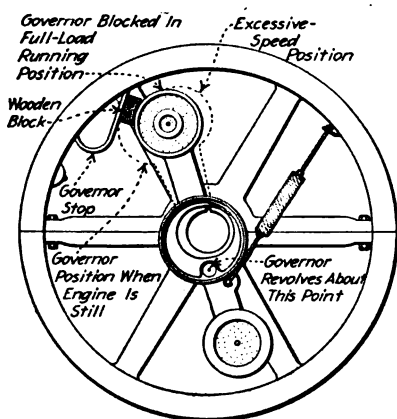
Shaft governor blocked in full-load running position for adjusting valve.
